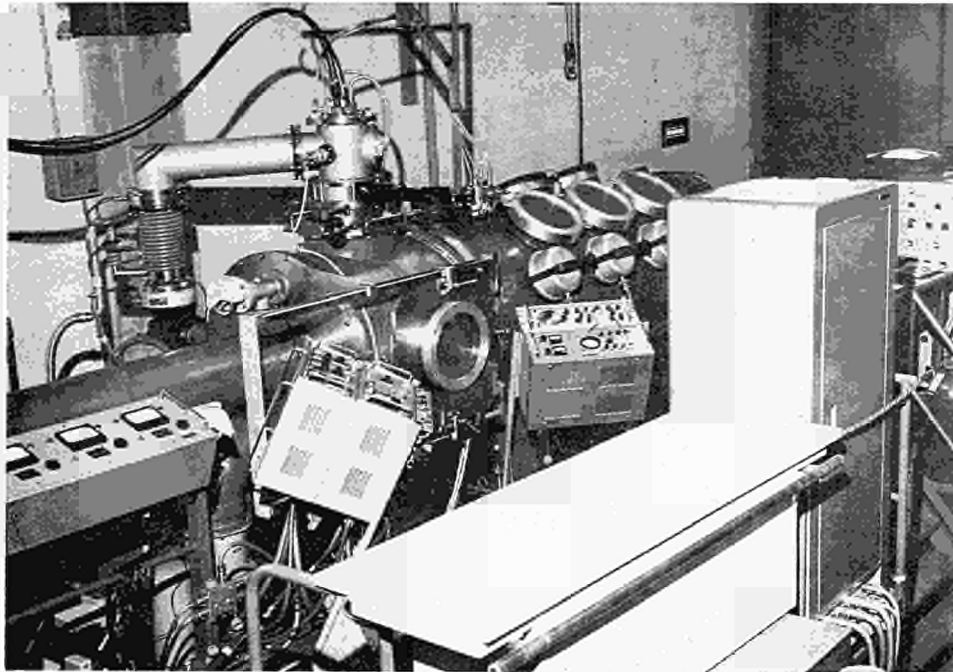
/C: View of an electron beam welding unit developed in Ispra.
